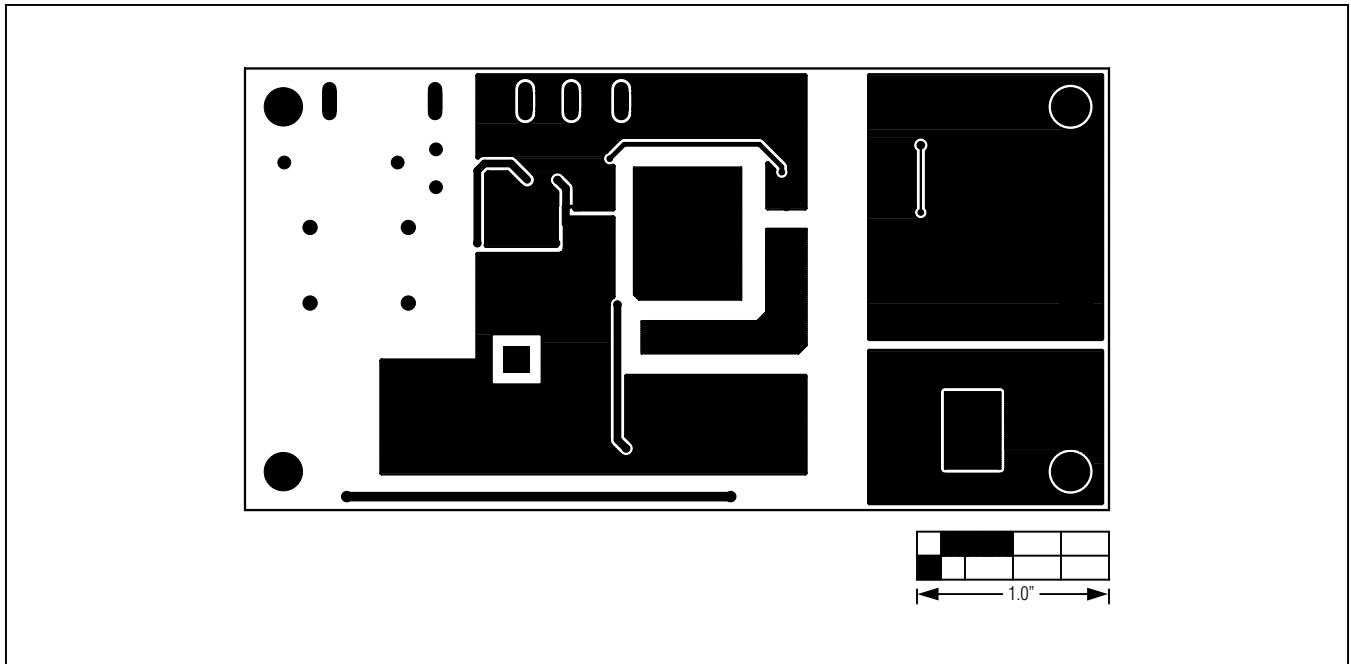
MAX17595 EV Kit PCB Layout—Solder Side
